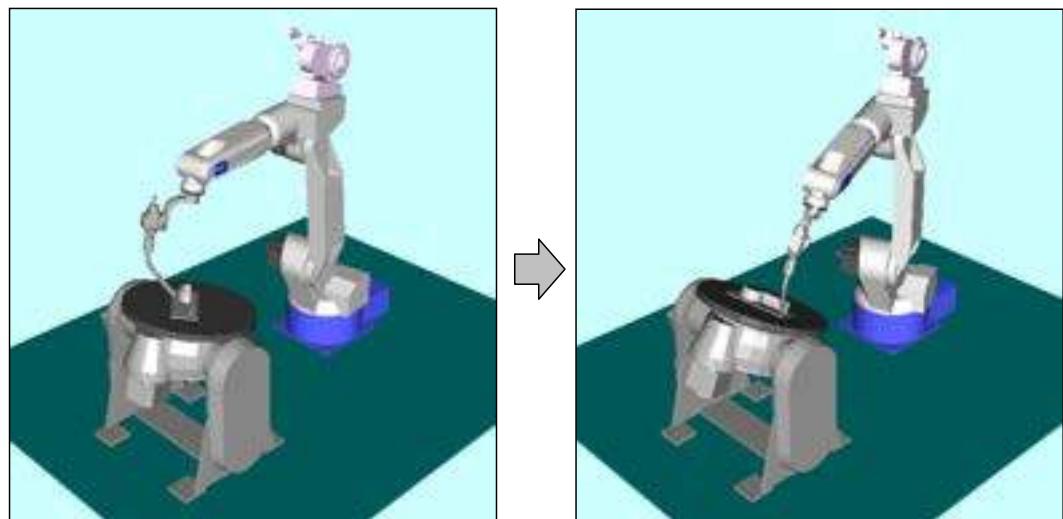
Arc welding using synchromotion control
